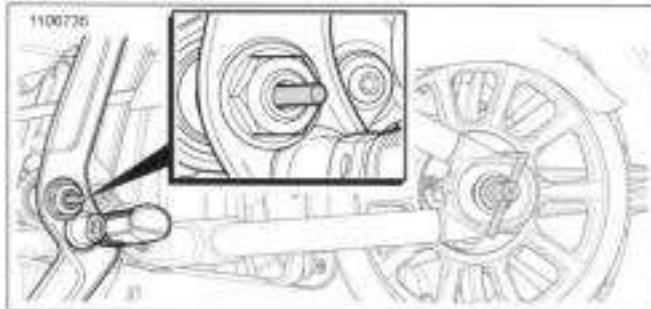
Rear Fork Pivot Shaft Alignment Rod
